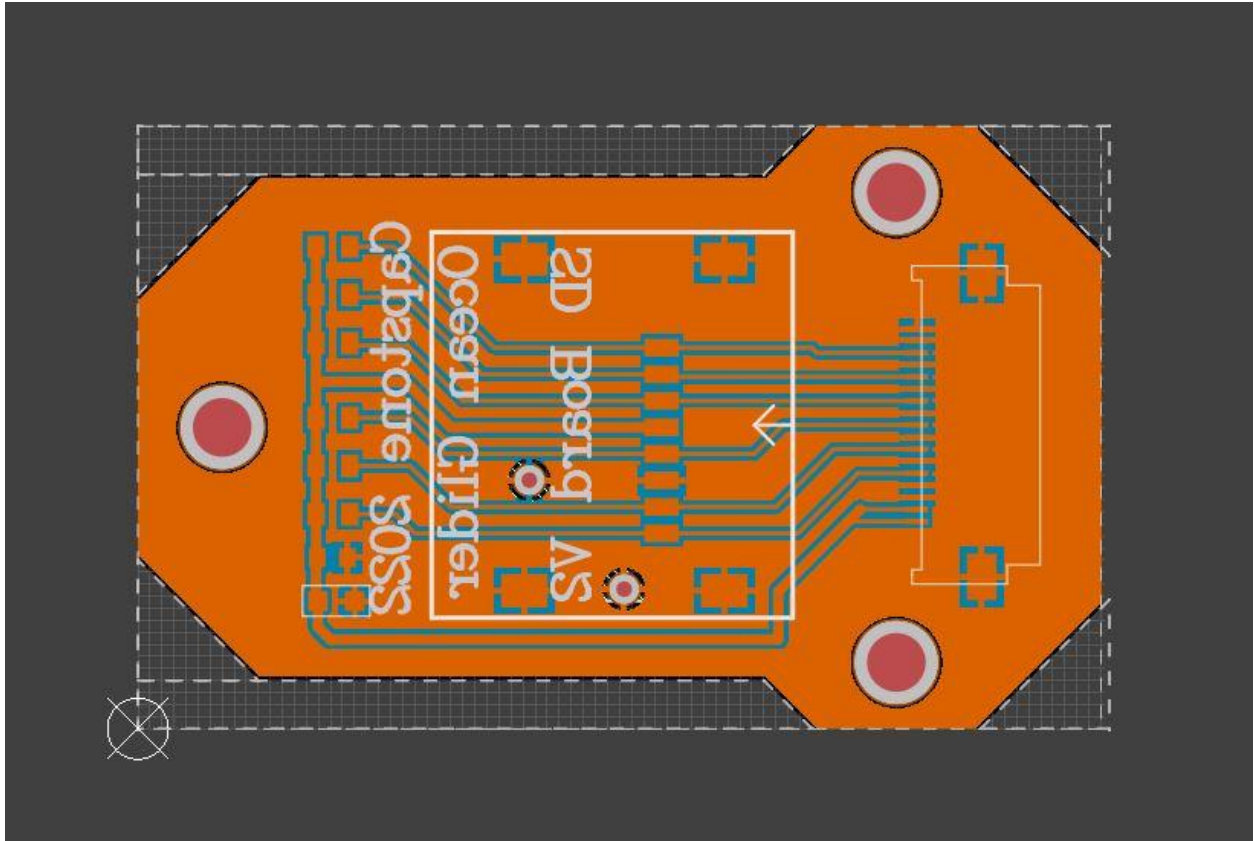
Important Dimensions for the MicroSD Card PCB
